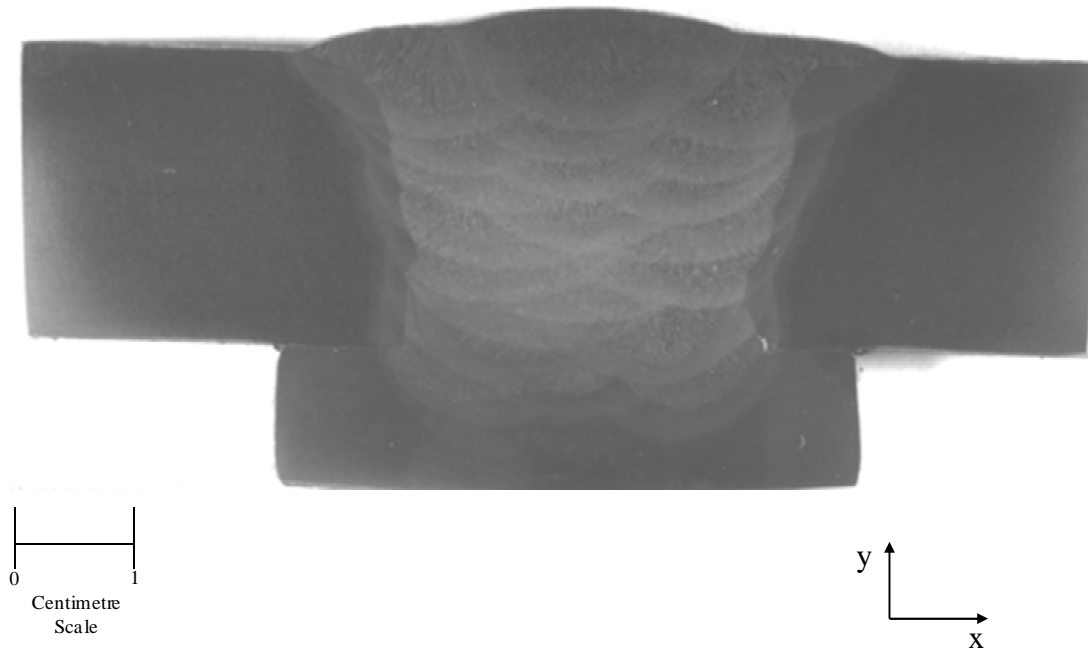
3 - Macrograph showing Weld N°2, MnMoNi steel weld metal cross - section showing weld microstructure.
